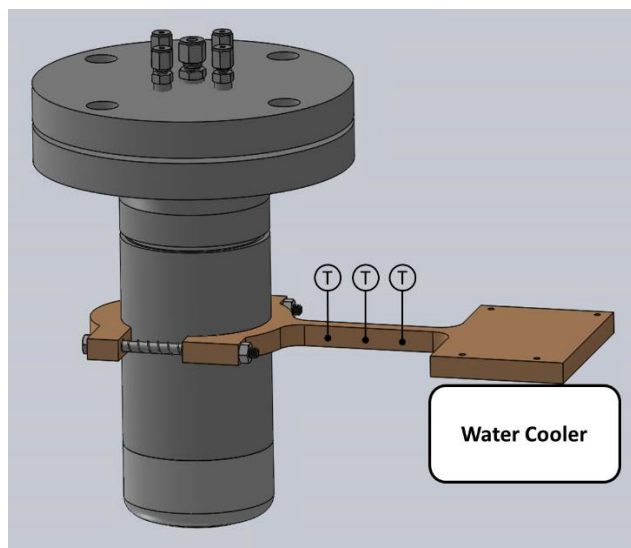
Rendering of reactor assembly with copper conducting collar and water-cooled heat sink
